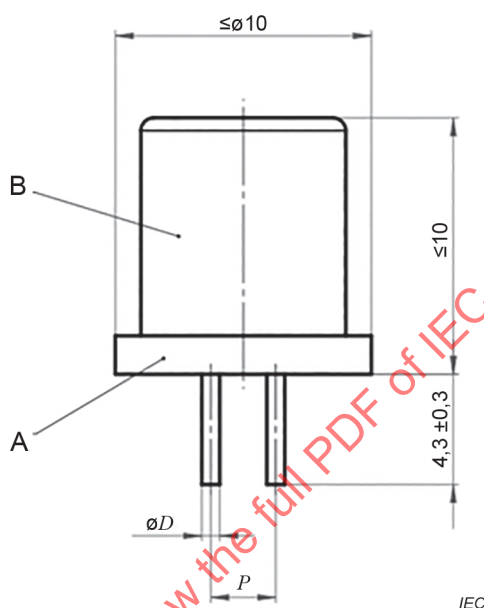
Outline of gauges and dummy fuse-links according to IEC 60127-3:2015, standard sheet 1
